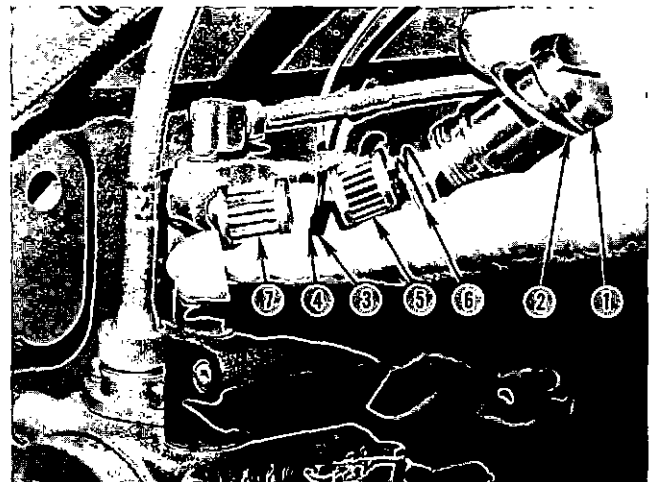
, N11940. Fuel pump filter assembly — PT (type G) fuel pump with MVS governor
